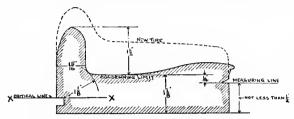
STEEL TIRE, RETAINING RING FASTENING.
